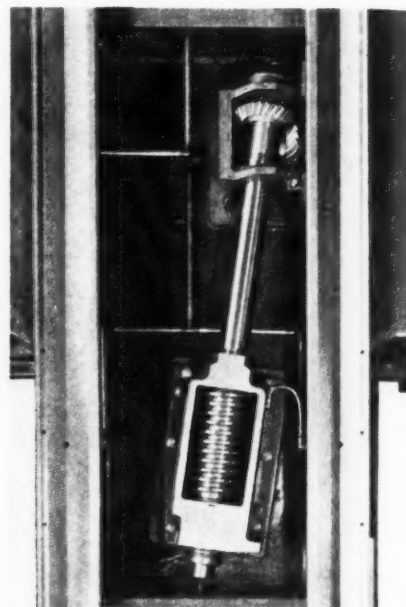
Hypoid and Spiral Gear Drive to Table of Gray Milling Machine
